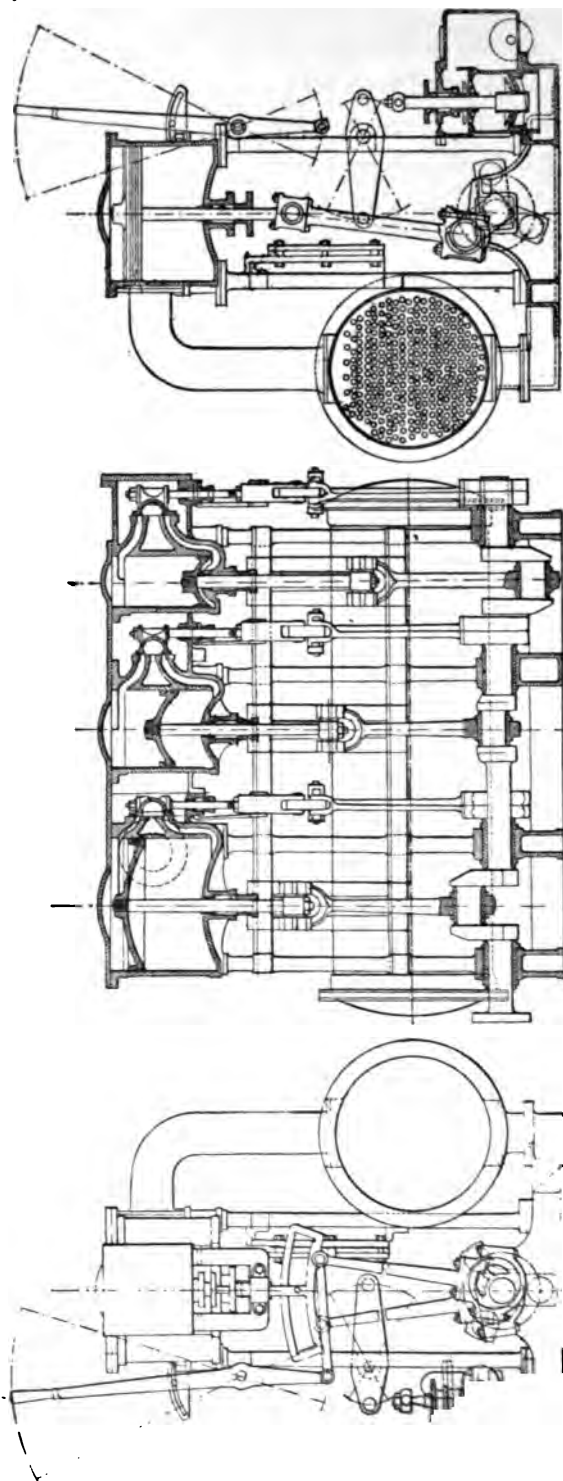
Yacht Steam Engine, with Joy's Gear, by Messrs. T. Bates & Co. (Pollit & Wigzell). Scale $\frac{1}{20}$ th.
